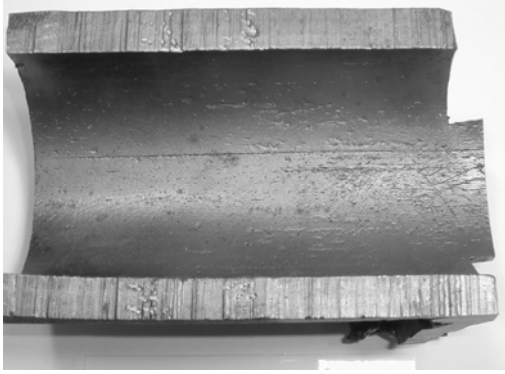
Pictures showing a tube section with external attachment weld removed from a boiler. Removal of oxide scale from internal surface revealed clear signs of SAC cracks in the area of attachment weld.
